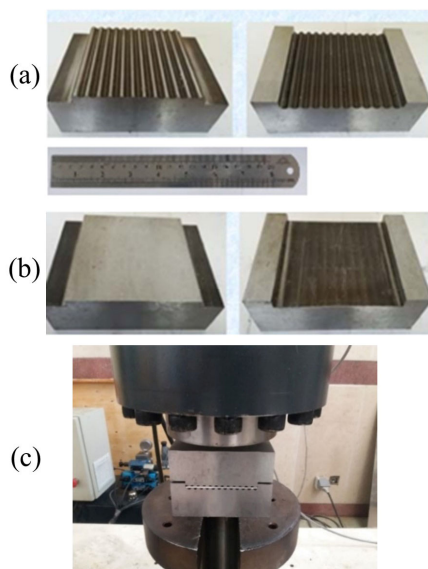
CGP dies: (a) grooving die, (b) flattening dies, (c) CGP dies under press (groove angle $\theta = 45^\circ$, groove width = 2 mm, and die dimension = 96×96 mm).
